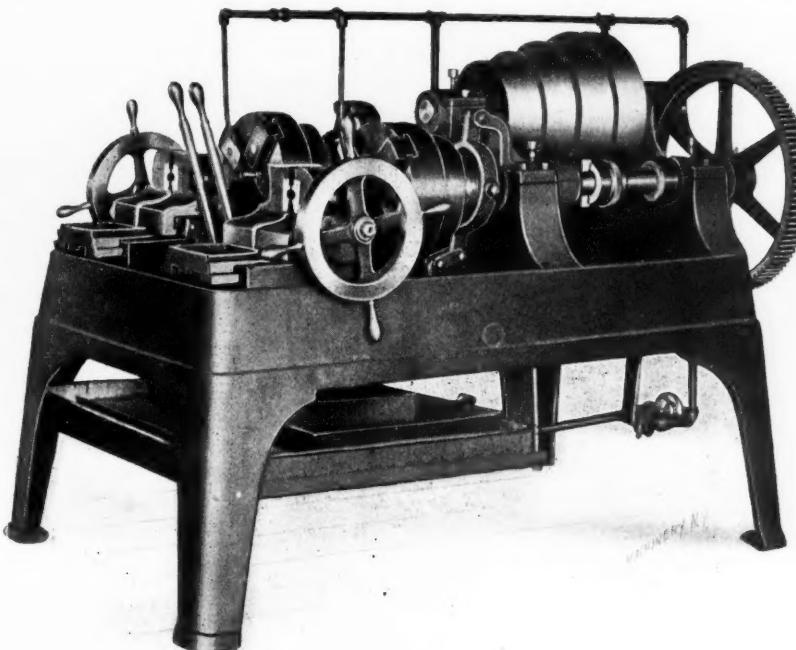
Murchey No. 2 Pipe and Nipple Threading Machine equipped with Improved Opening Die Heads
